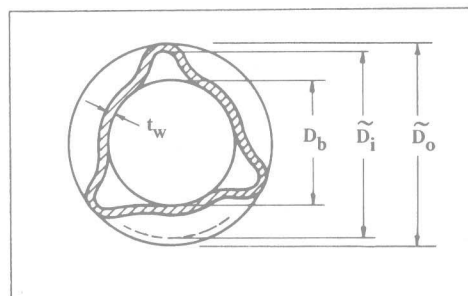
Sketch of the Turbotec corrugated tube showing reference diameters.
